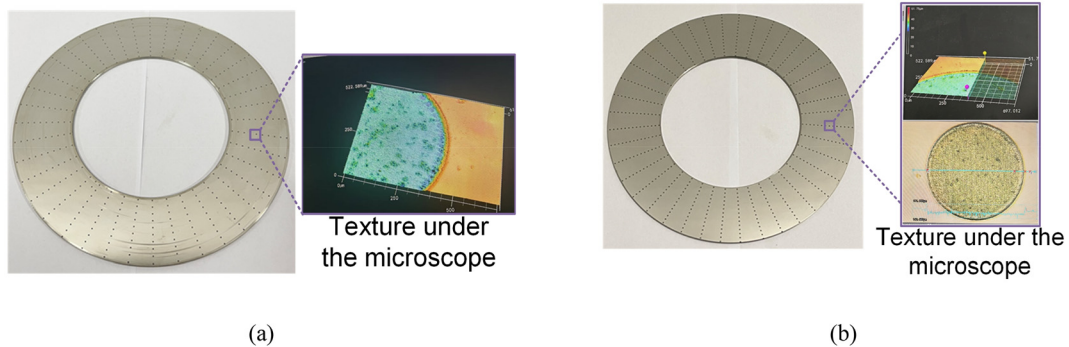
Fabricated textured thrust pads: (a) textured thrust pad before optimization and (b) textured thrust pad after optimization using laser processing.
